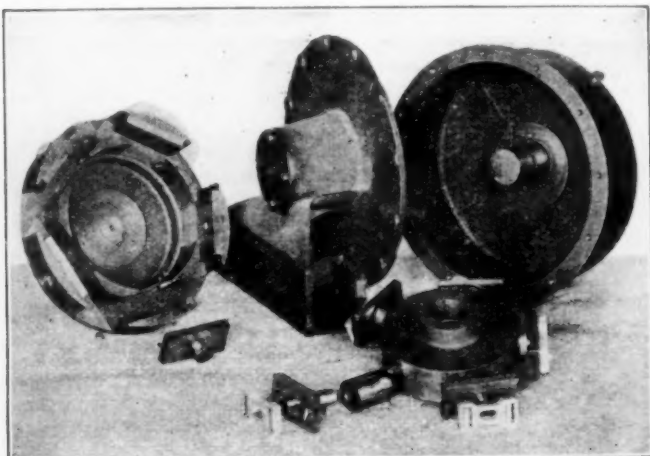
DISASSEMBLED VIEW OF DETACHED ROTARY MOTOR CONTROLLED BY OILGEAR HYDRAULIC TRANSMISSION
